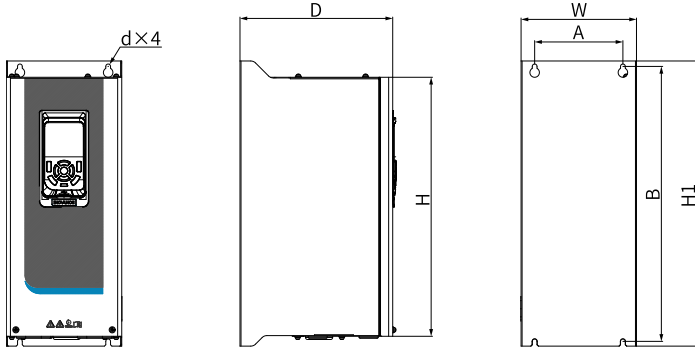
Outline dimensions and mounting dimensions of S4 models
